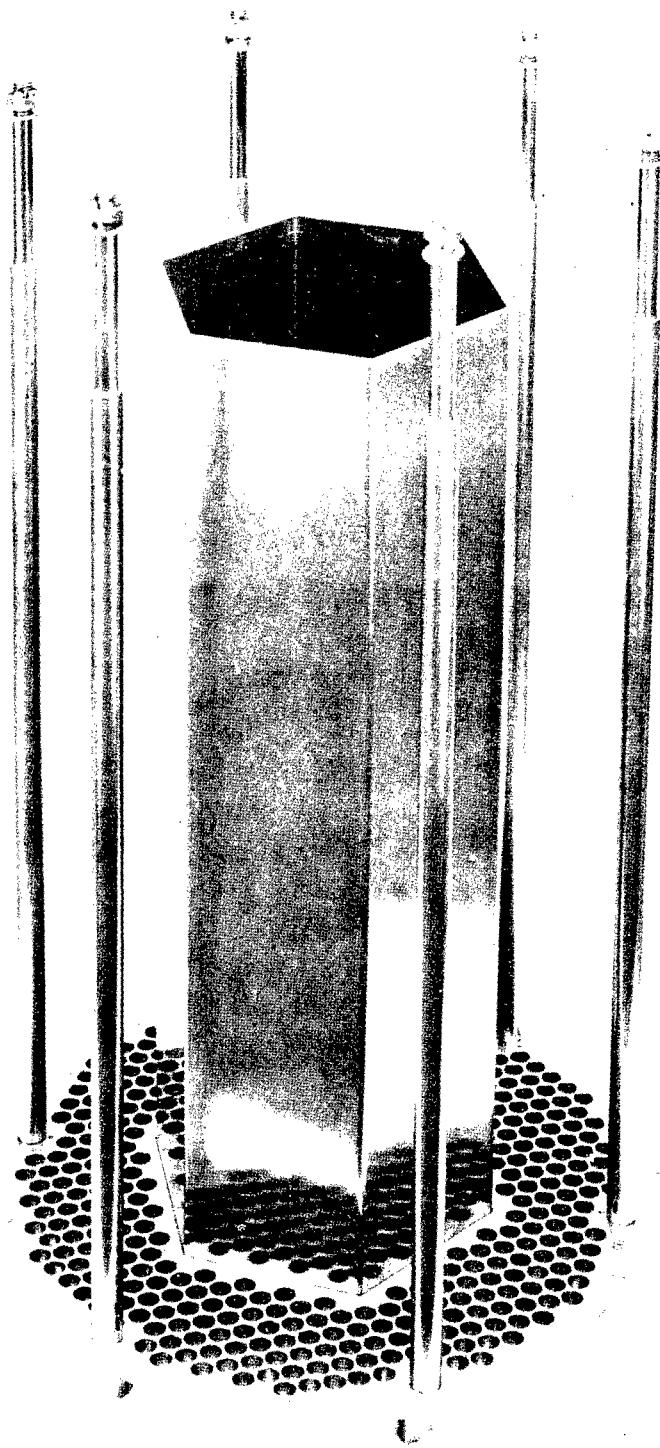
Bottom Plate with Tie Rods and Coolant Flow Separator
